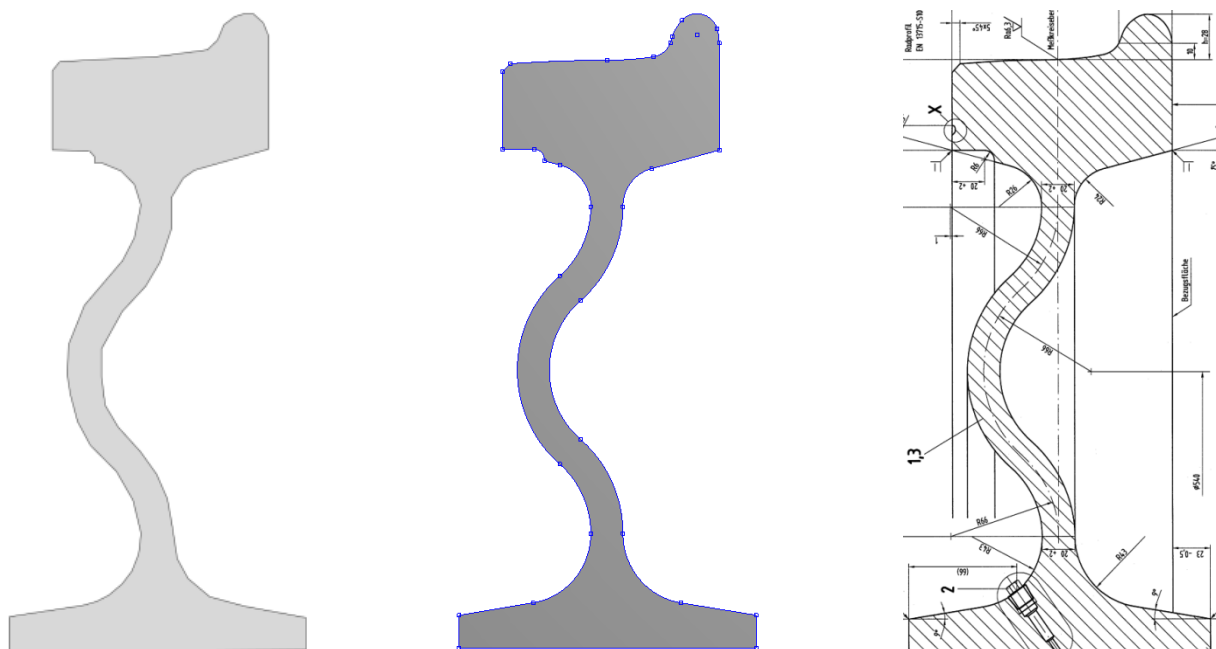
Steel wheel profile geometries (left: initial CAD; middle: updated CAD ; right: ref. 2d drawing)
